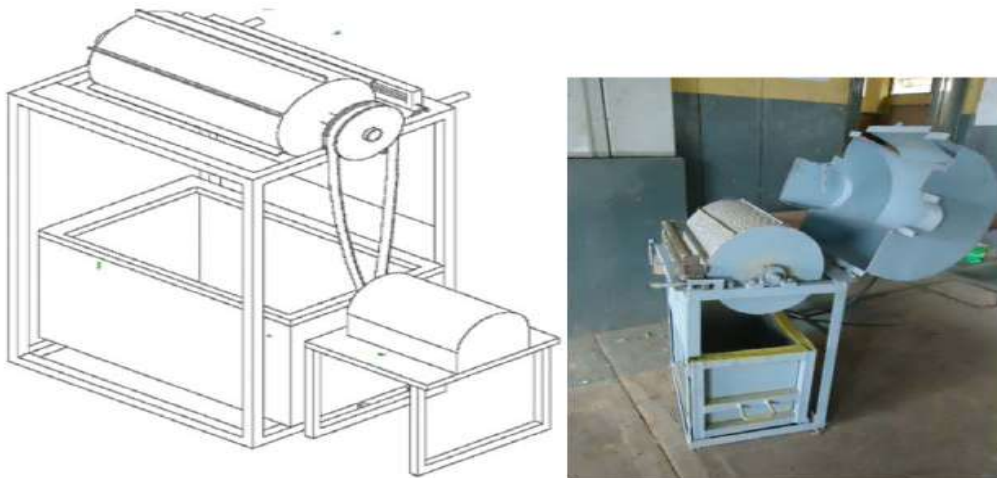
Modeled machine Figure 3.27. Developed machine
